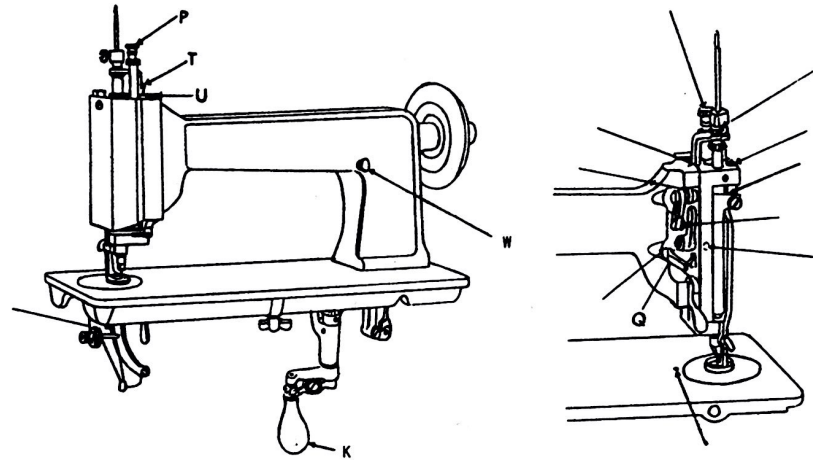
Adjustments on the Machine Fig. 9. Oiling points and Adjustments at the Back of the Machine
